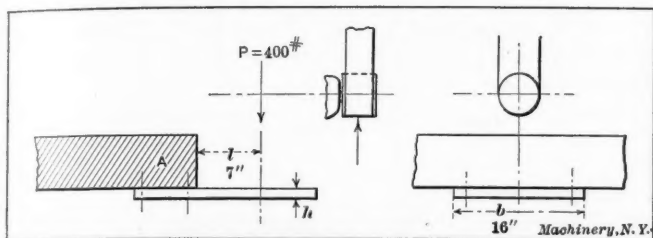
Plain Sheet-steel Motor Support, Upward Belt Pull
